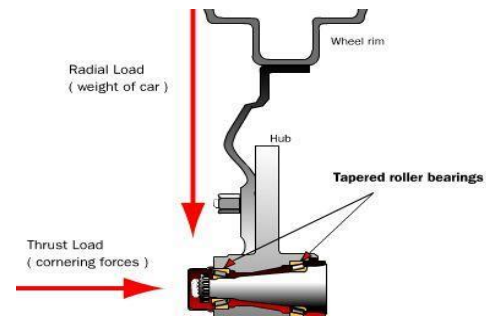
Bearings in a car wheel are subject to both thrust and radial loads.
